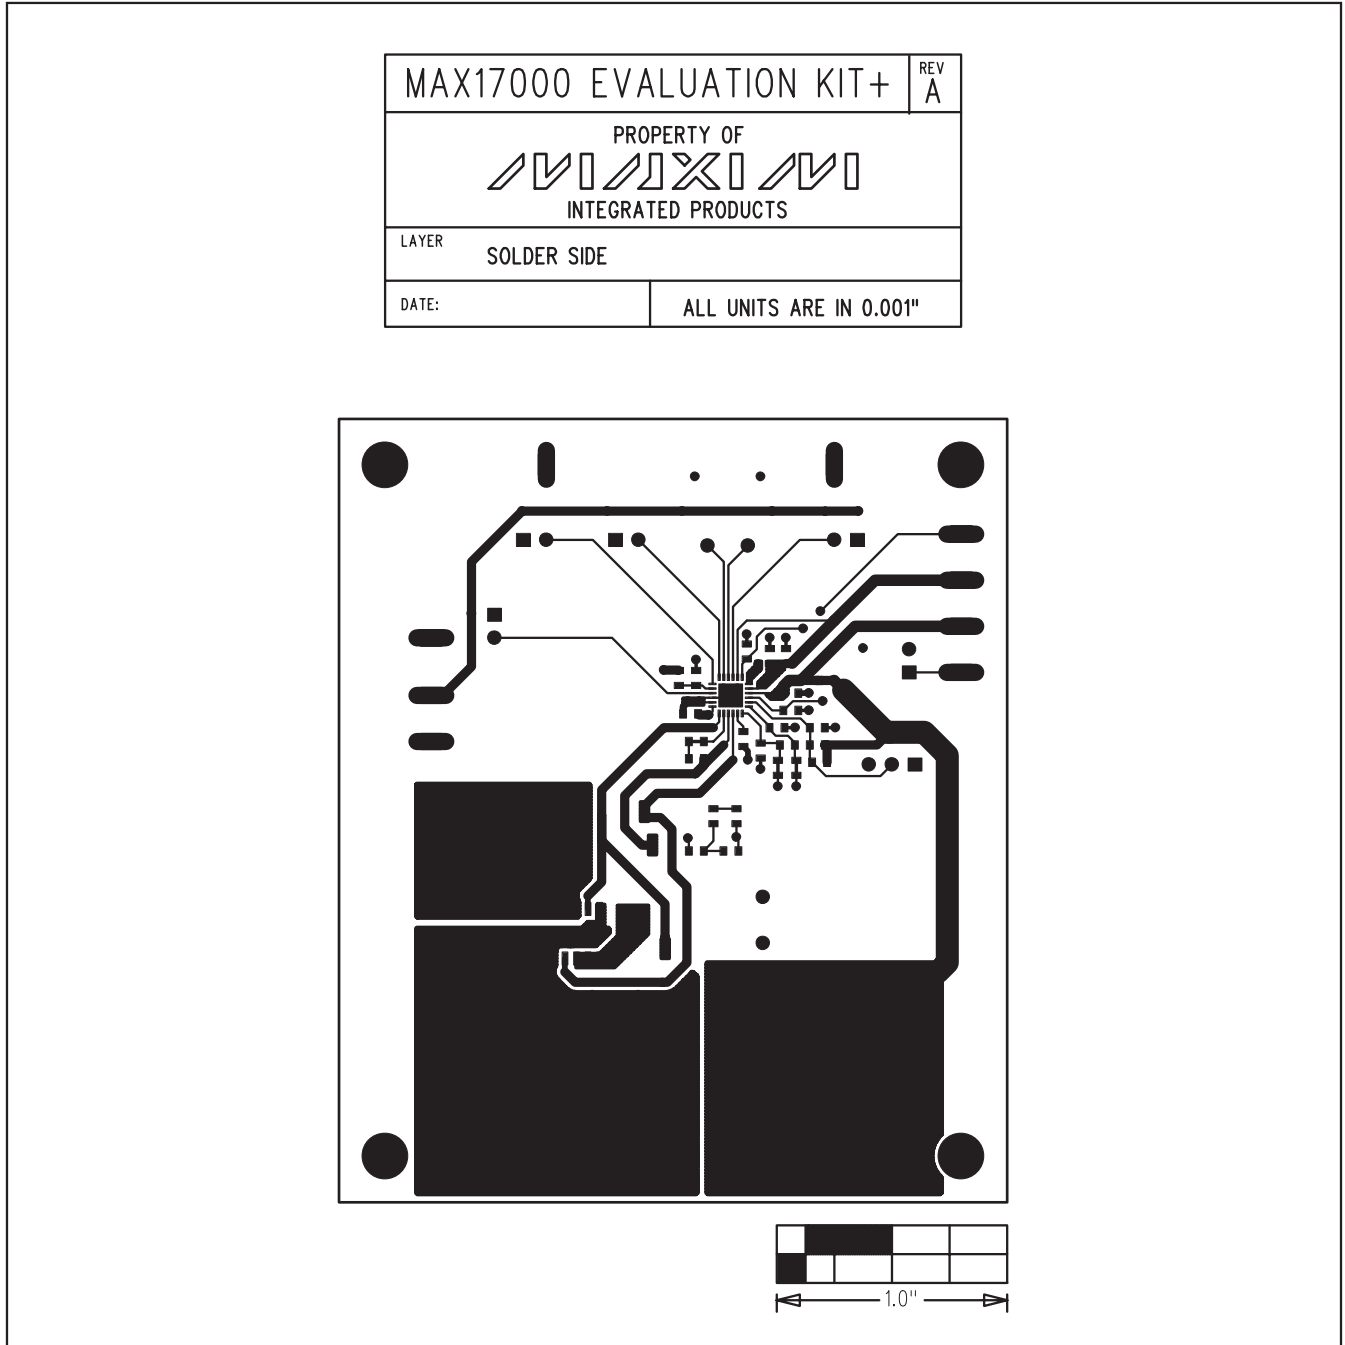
MAX17000 EV Kit PCB Layout—Solder Side
